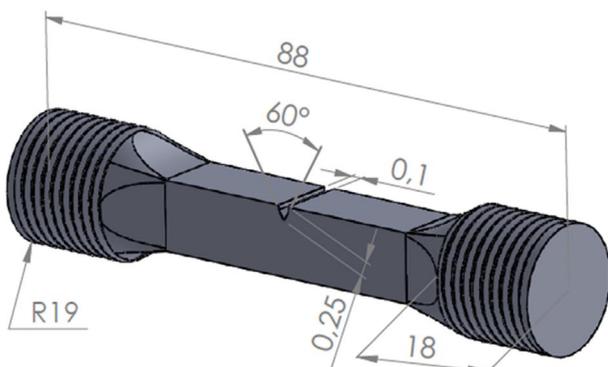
Fatigue crack propagation test sample CC10
